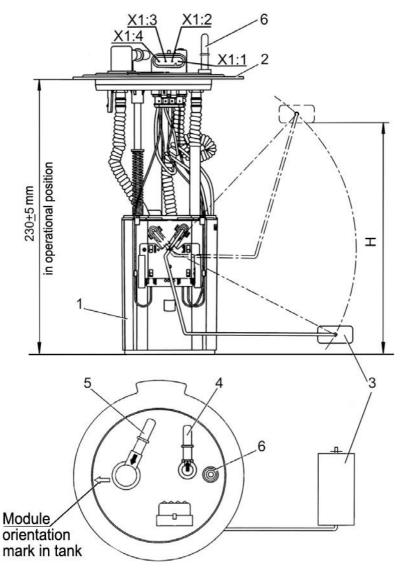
Fuel intake modules: H - float position; 1 - recuperator; 2 - clamping ring; 3 - fuel level sensor float; 4, 5, 6 - fittings
